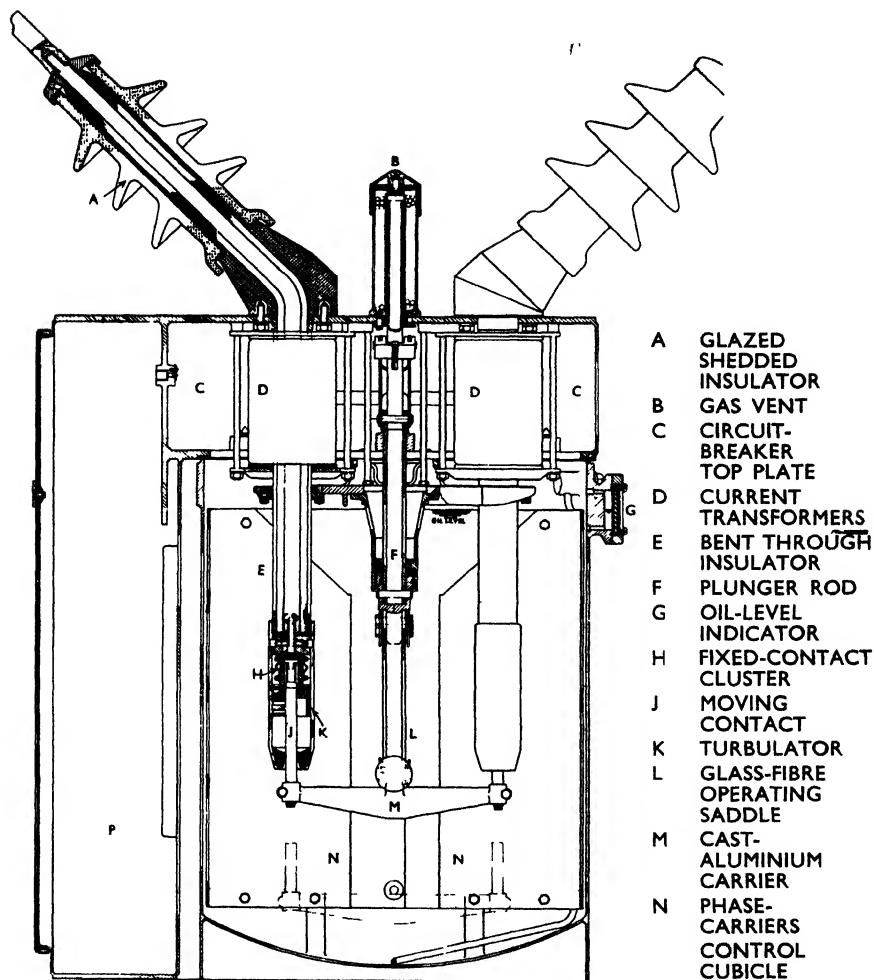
Cross-section of 33 kV outdoor circuit-breaker for pedestal mounting (A. Reyrolle & Co. Ltd.).
